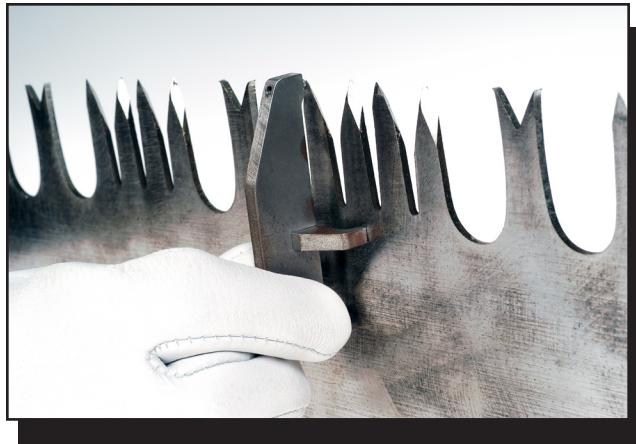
The adjustable spider gauge is used to determine the amount of set in a tooth. This spider gauge can be adjusted by using an allen wrench to turn the top screw to the desired tooth set.
